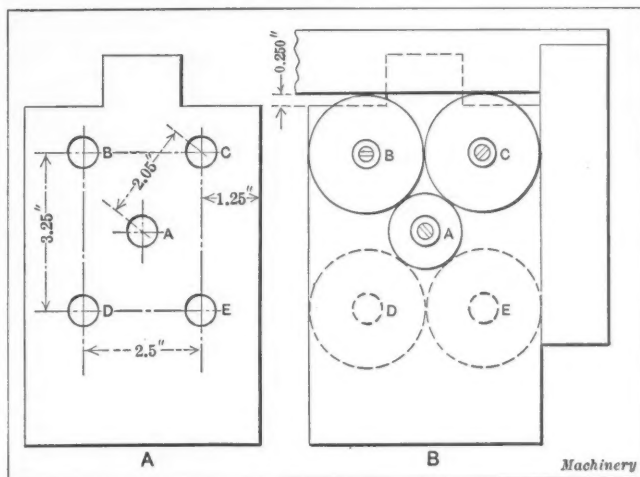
Locating Five Holes in Jig Templet by the Disk-and-button Method
